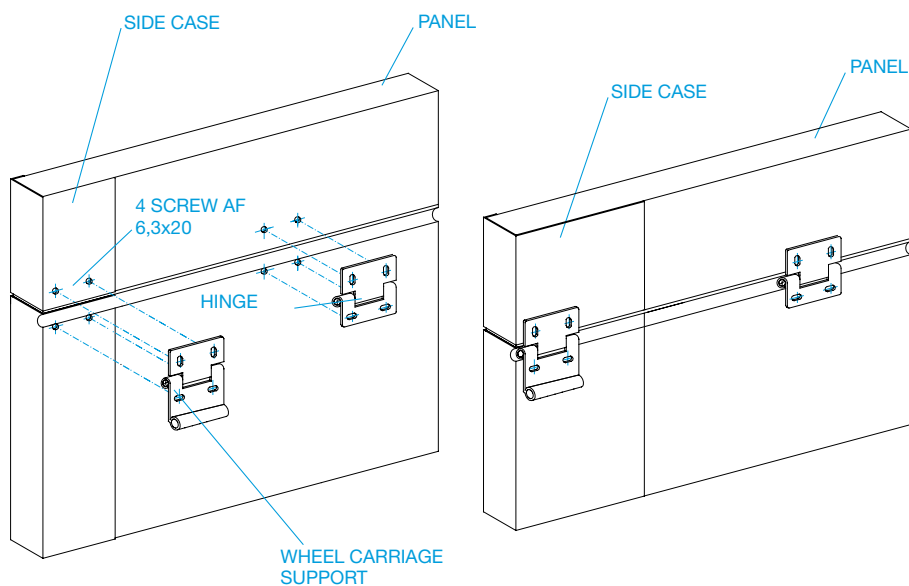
TANDEM WHEEL CARRIAGE ON MIDDLE PANELS
